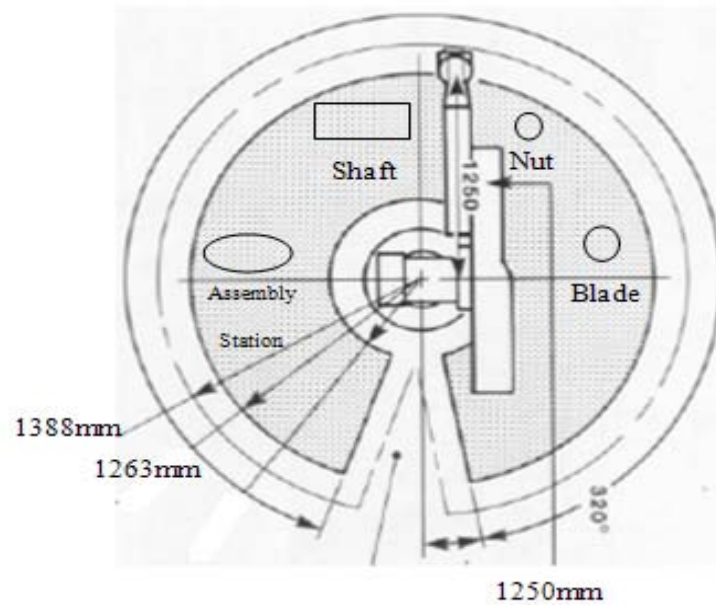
Workcell-2 for grinder assembly with Puma-762 Robot
